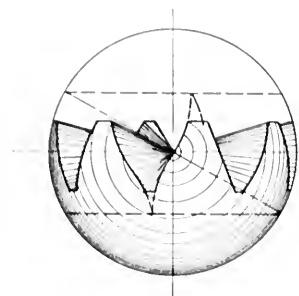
THE INVOLUTE CROWN GEAR (GRANT)
